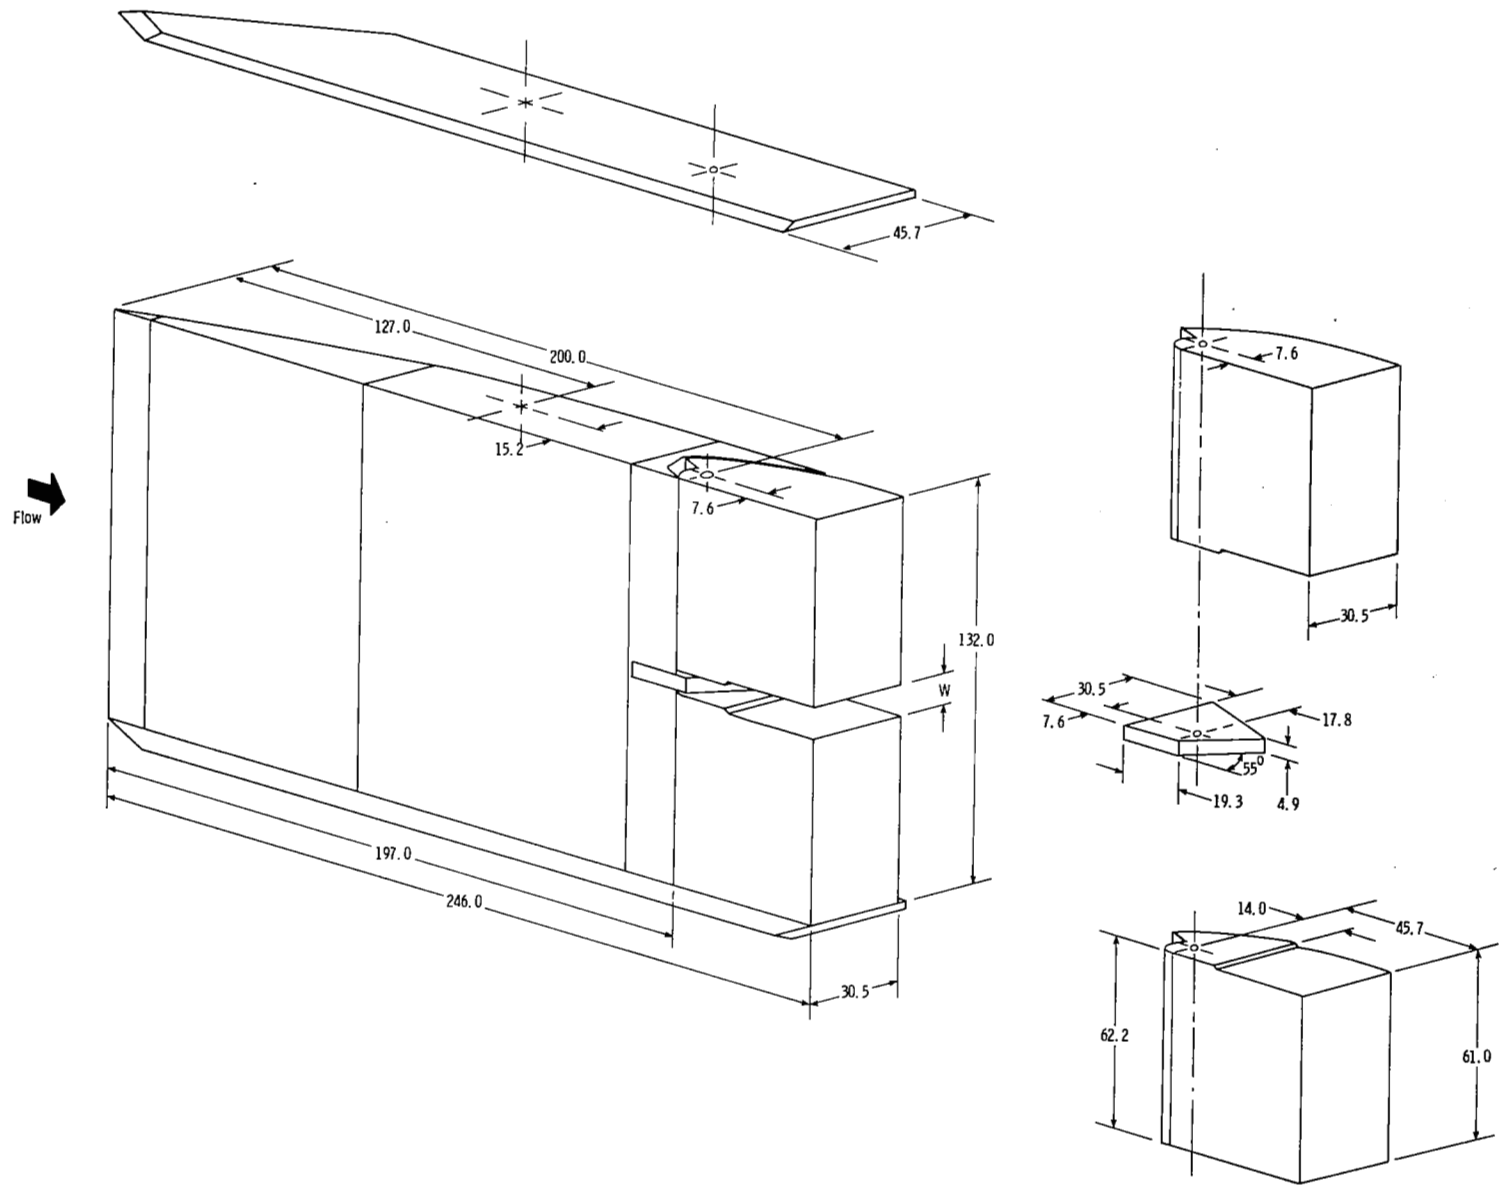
Exploded view of test model. (All dimensions are in centimeters.)
